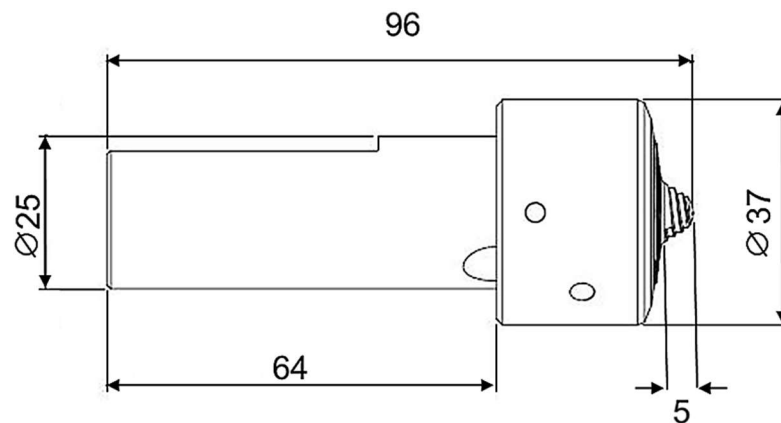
Basic dimensions (mm) of the M-series pcBN tool, adapted from [6.35]
